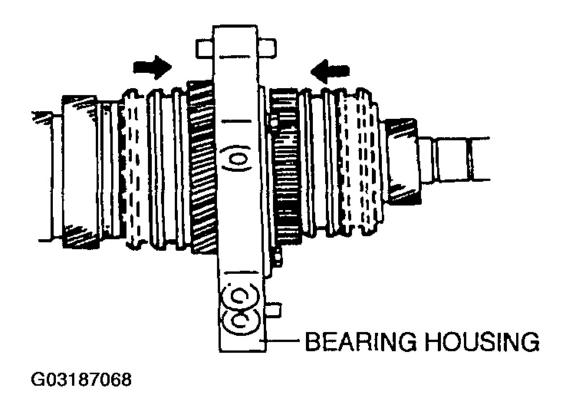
Shifting Clutch Hub Sleeves Into 1st & Reverse Gears Courtesy of MAZDA MOTORS CORP.
